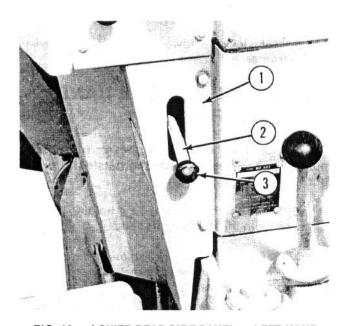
LOWER REAR SIDE PANEL — LEFT-HAND
